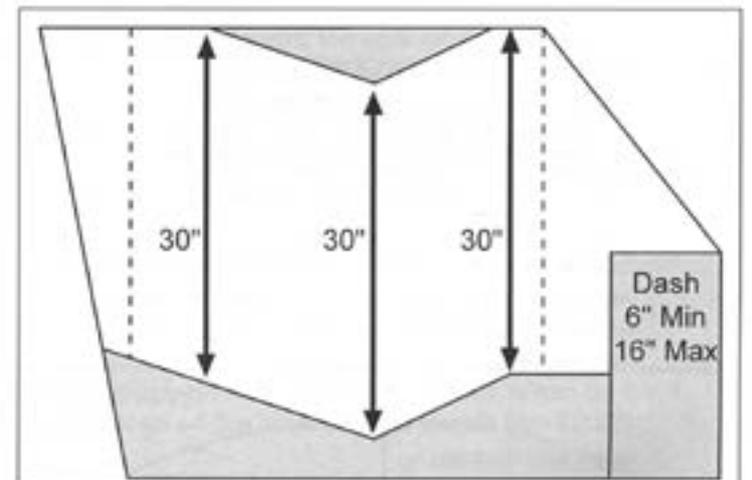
4 - In the above example, the OEM top windshield frame defines the vertical plane that is used to establish the front-to-back Free Space area. This example also depicts how changes to the roof build-down and floor build-up can be made provided a minimum vertical distance of 30 inches is maintained. Not to Scale.
